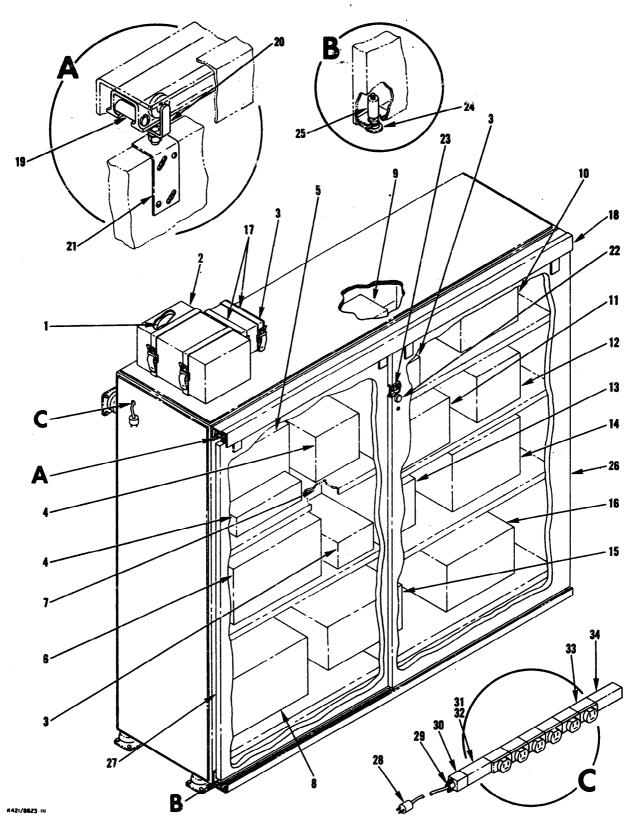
(1). Test Equipment and Cabinet assembly (Sheet 1 of 2).
